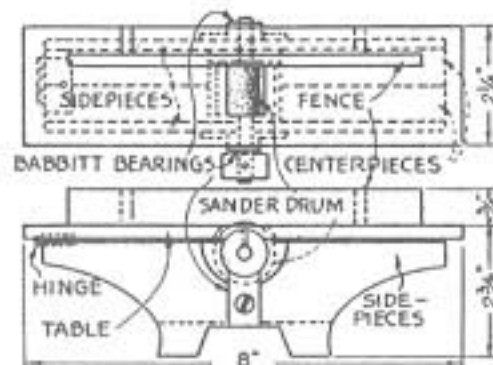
Details of construction of the drum sander shown in Fig. 43.
